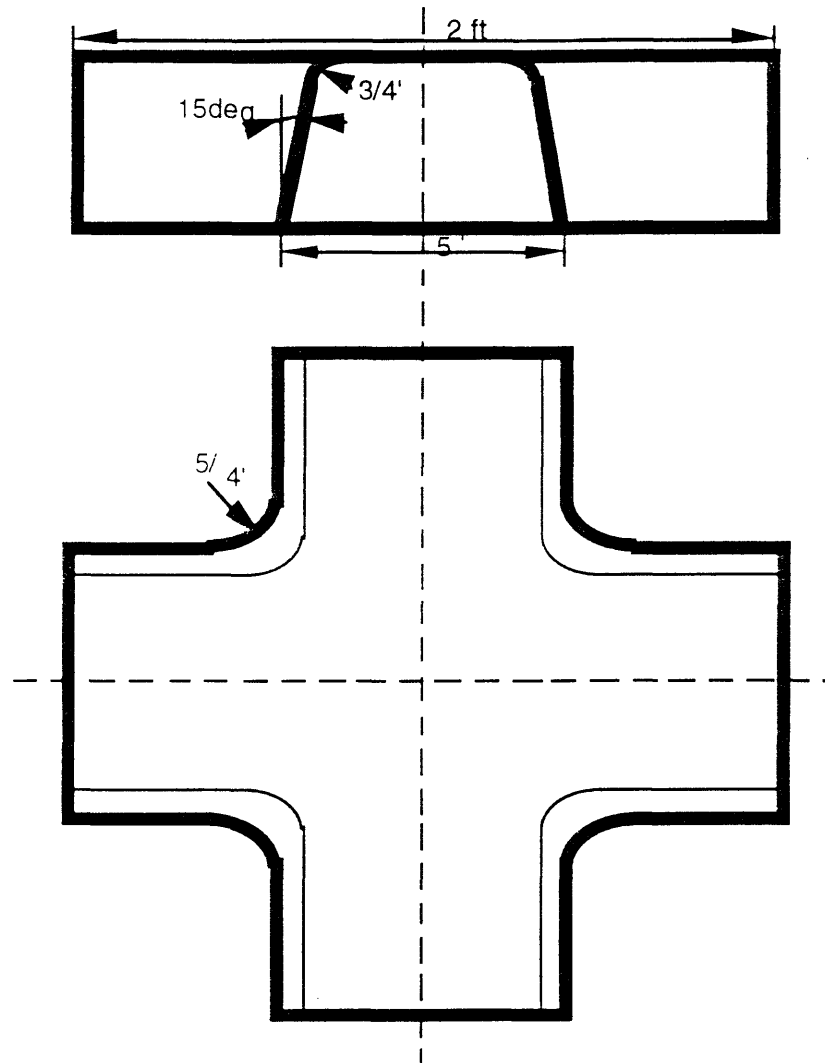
Top view and front view of the top-hat shape intersection part.
